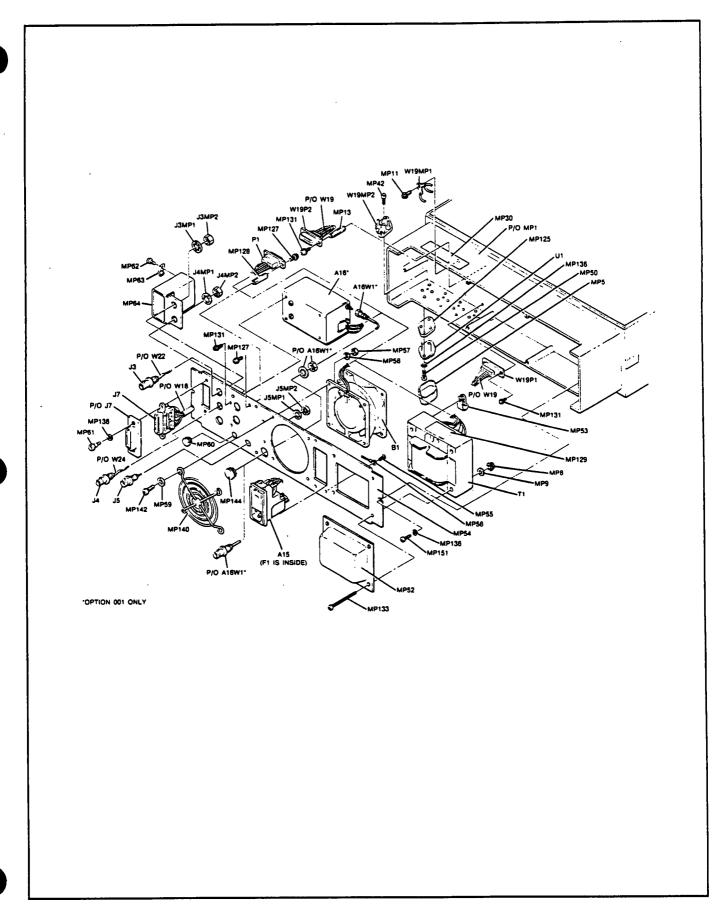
(2511A and above). Rear-Panel, Parts Identification
